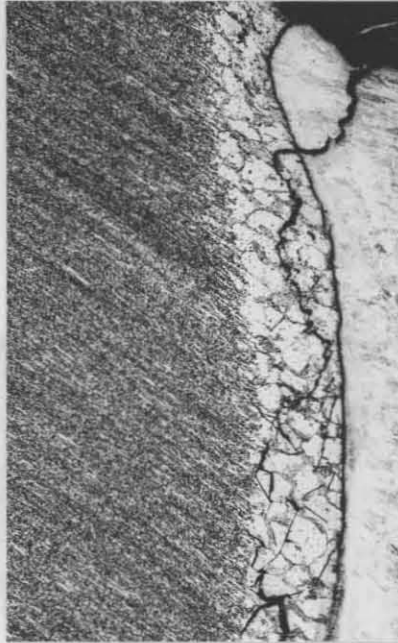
Partially cracked bead-on-plate bend specimen of steel D showing ductile fracture initiation in the weld metal and cleavage fracture propagation in the HT HAZ. Specimen tested at 90°C (35X).
